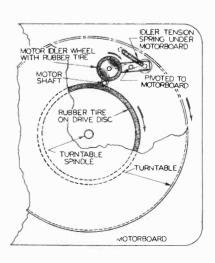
The rubber-tired wheel A is on the motor shaft and this drives the rubber-tired wheel B that in turn makes contact with the rim under the turn-table and so drives it.
